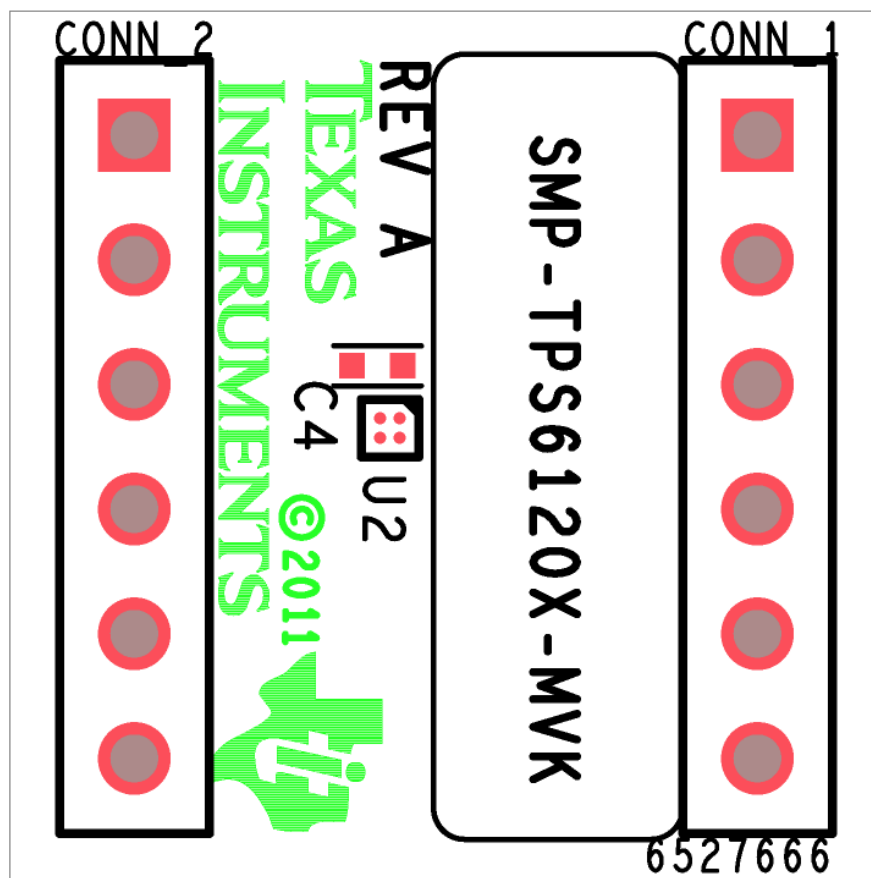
SMP-TPS61200-MVK Board Silkscreen – Bottom Side
